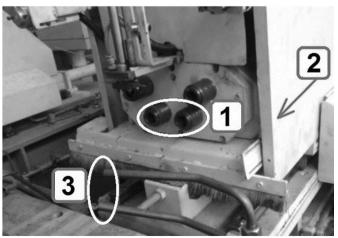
Multi spindle machine for drilling Samand brake caliper شکل 5 ماشین مخصوص چهار اسپیندل سوراخکاری کالیپر ترمز سمند
